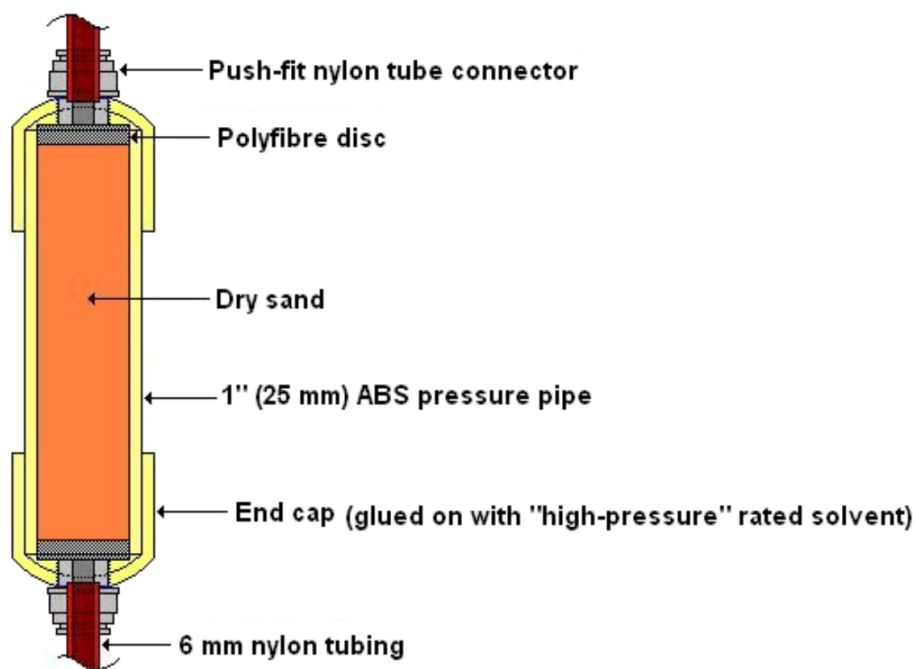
Design of flashback arrestors for HHO welding.
